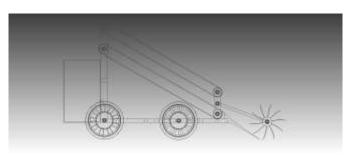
CAD Drawing of waste collecting machine (side view)
